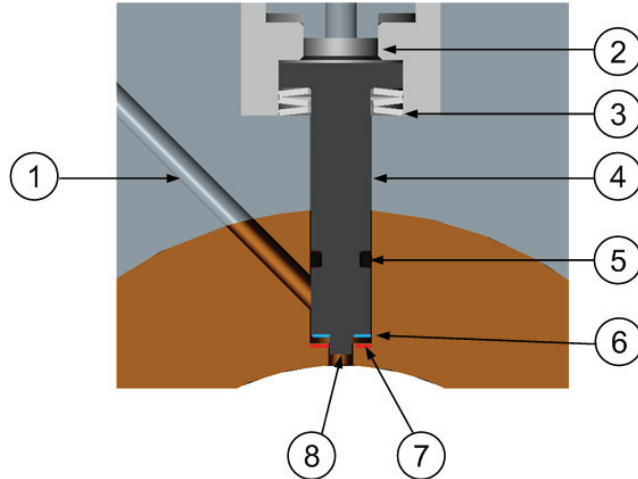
Injection subsystem. 1 - Supply channel, 2 - Piezo actuator, 3 - Belleville washers, 4 - Plastic pin, 5 - O-ring seal, 6 - Rubber sealing, 7 - Bottom of the injection chamber, 8 - Tip of the pin.
